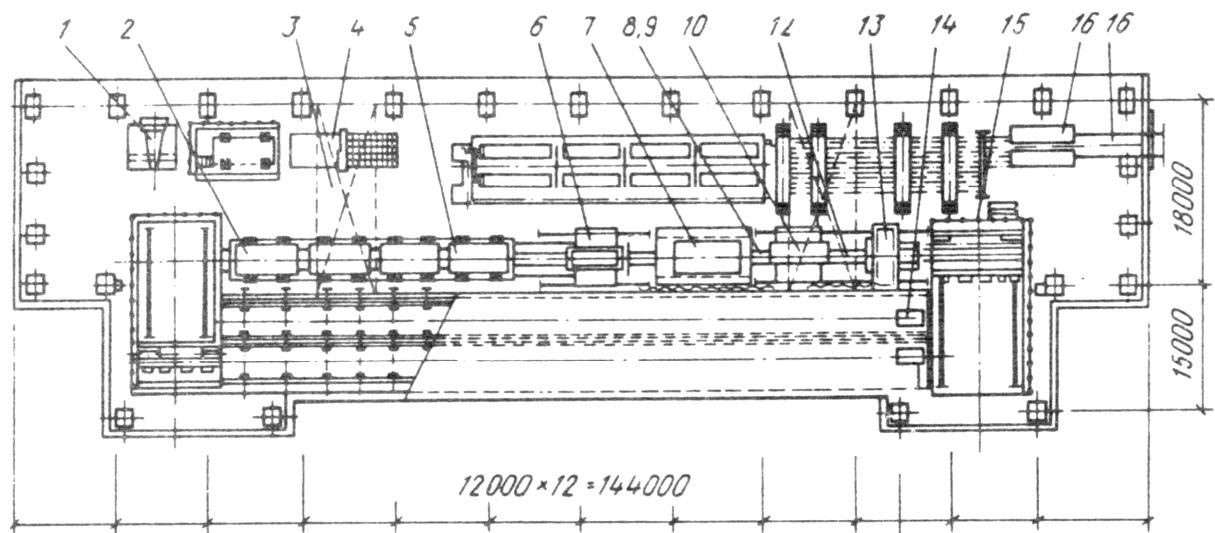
Technological line for making outer wall panels with surface slit type cameras: 1 - cantilever crane; 2 - turn-over device SMZh-439; 3 - overhead crane; 4 - mechanism of opening and closing of boards of SMZh-453; 5 - finishing line; 6 - concrete paver SMZh-166B; 7 - sound-insulating hull SMZh-653; 8-vibratory plate SMZh-B; 9 - suspended rails SMZh-458;10 – concrete paver SMZh-528; 11 - drive SMZh-300B A-17; 12 - sections for installation of products; 13 - finishing machine SMZh-461;14 - equipment for slit type cameras SMZh-445;15 - transfer car SMZh-444-02; 16 - self-propelling car SMZh-151.
